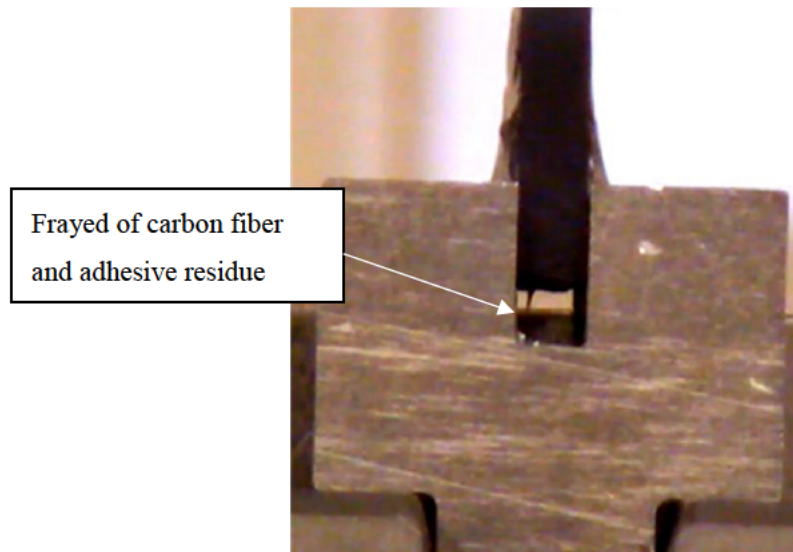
Image of carbon fibers frayed and left on aluminum pieces during a tensile test of a bonded product with adhesive.
